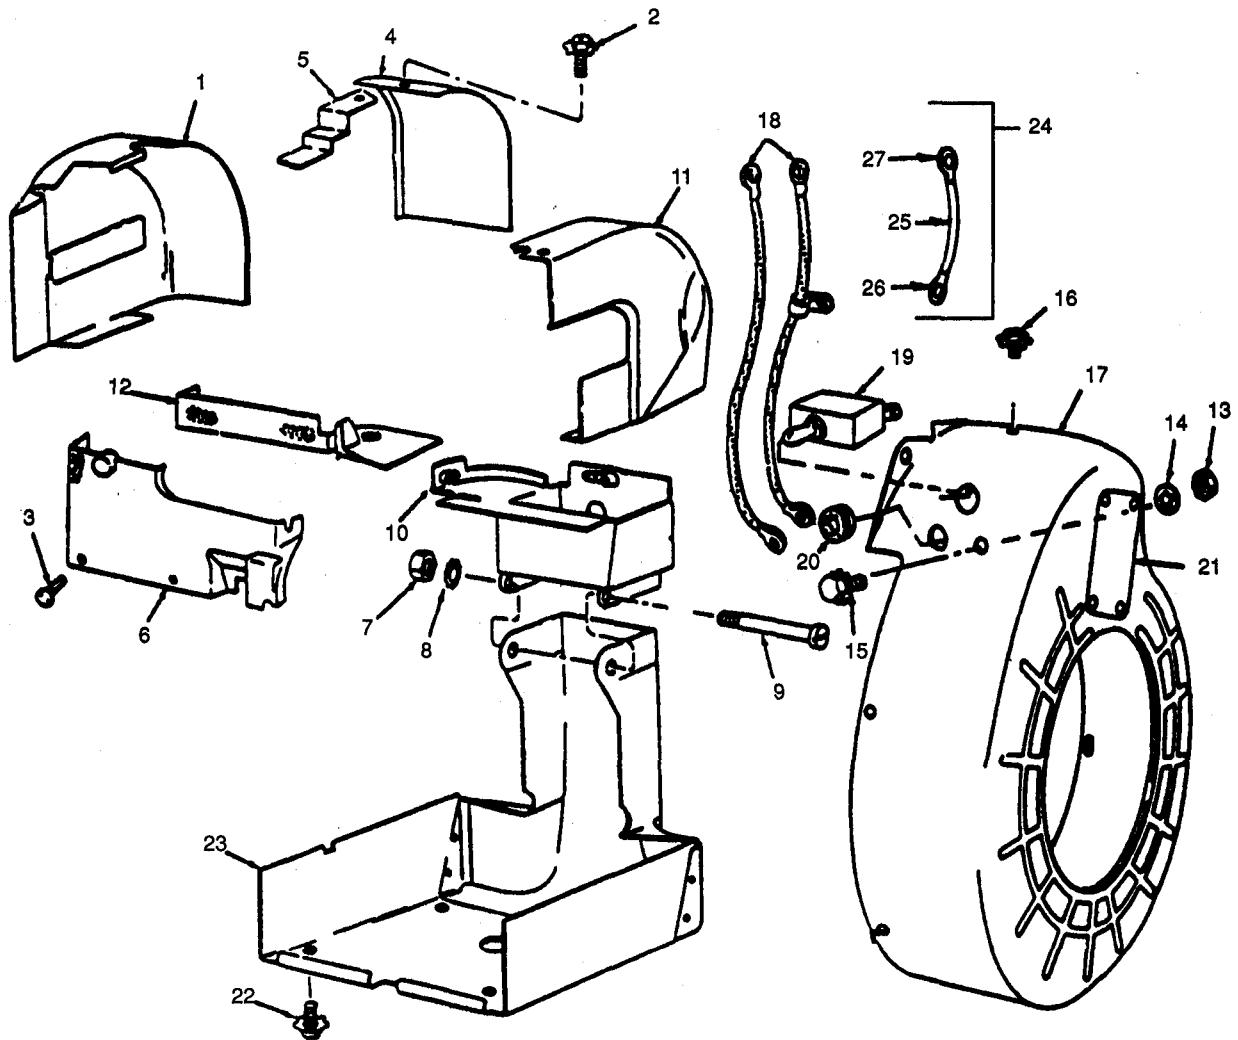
Flywheel and Cylinder Head Covers, Lower Air Duct, and Ignition Switch
